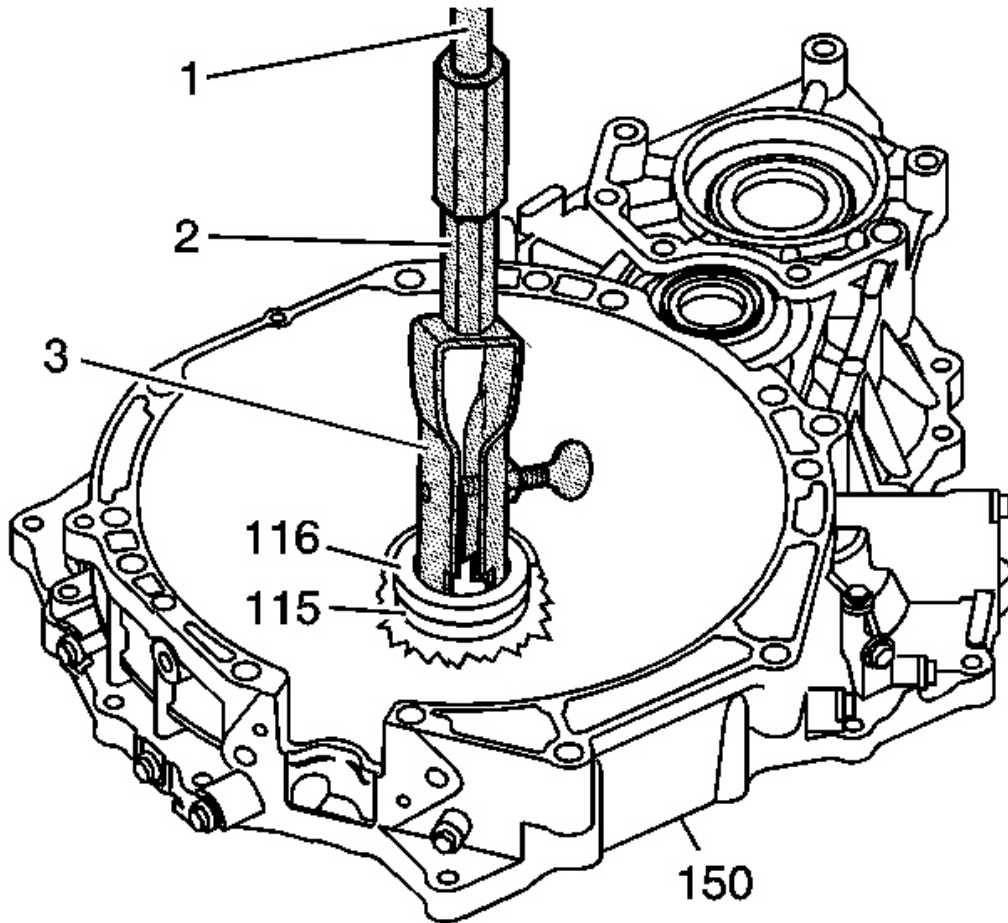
J 26941, SA9133T, SA9133T-1 & Torque Converter Housing
